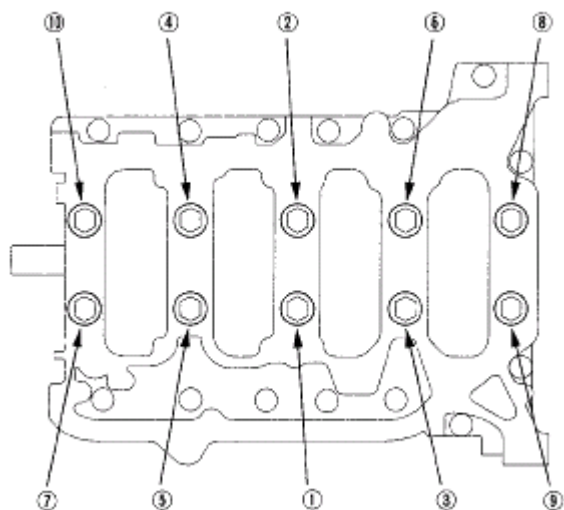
Identifying Crankshaft Bolt Tightening Sequence
